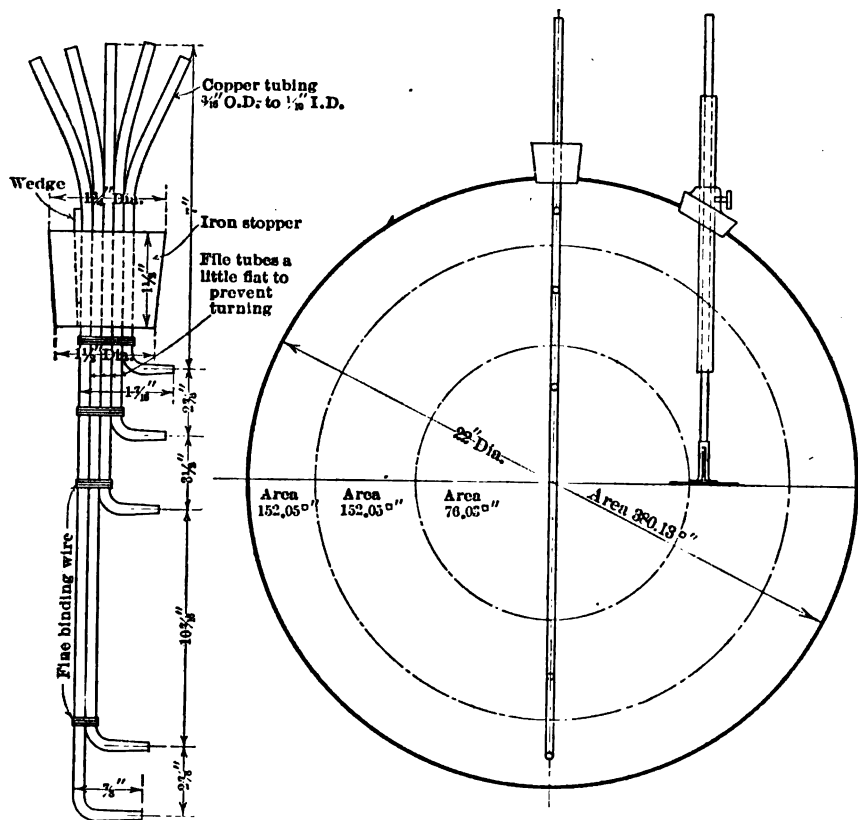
PLATE IV.—IMPACT END OF PITOT TUBE FOR 22-IN. PIPE.
